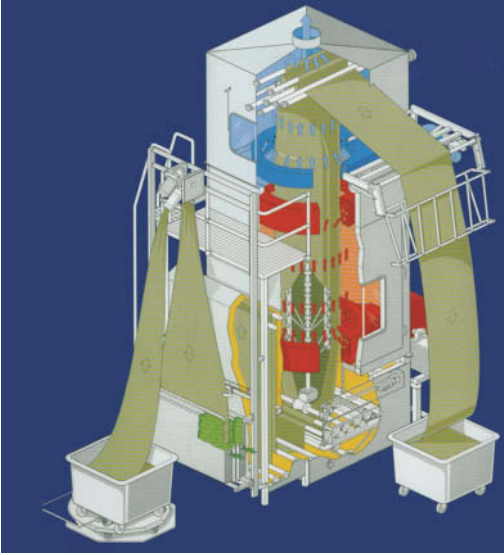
Heat setting of tubular cotton/lycra knitted fabric; technical drawing of Dornier thermosetting range EcoFix.
